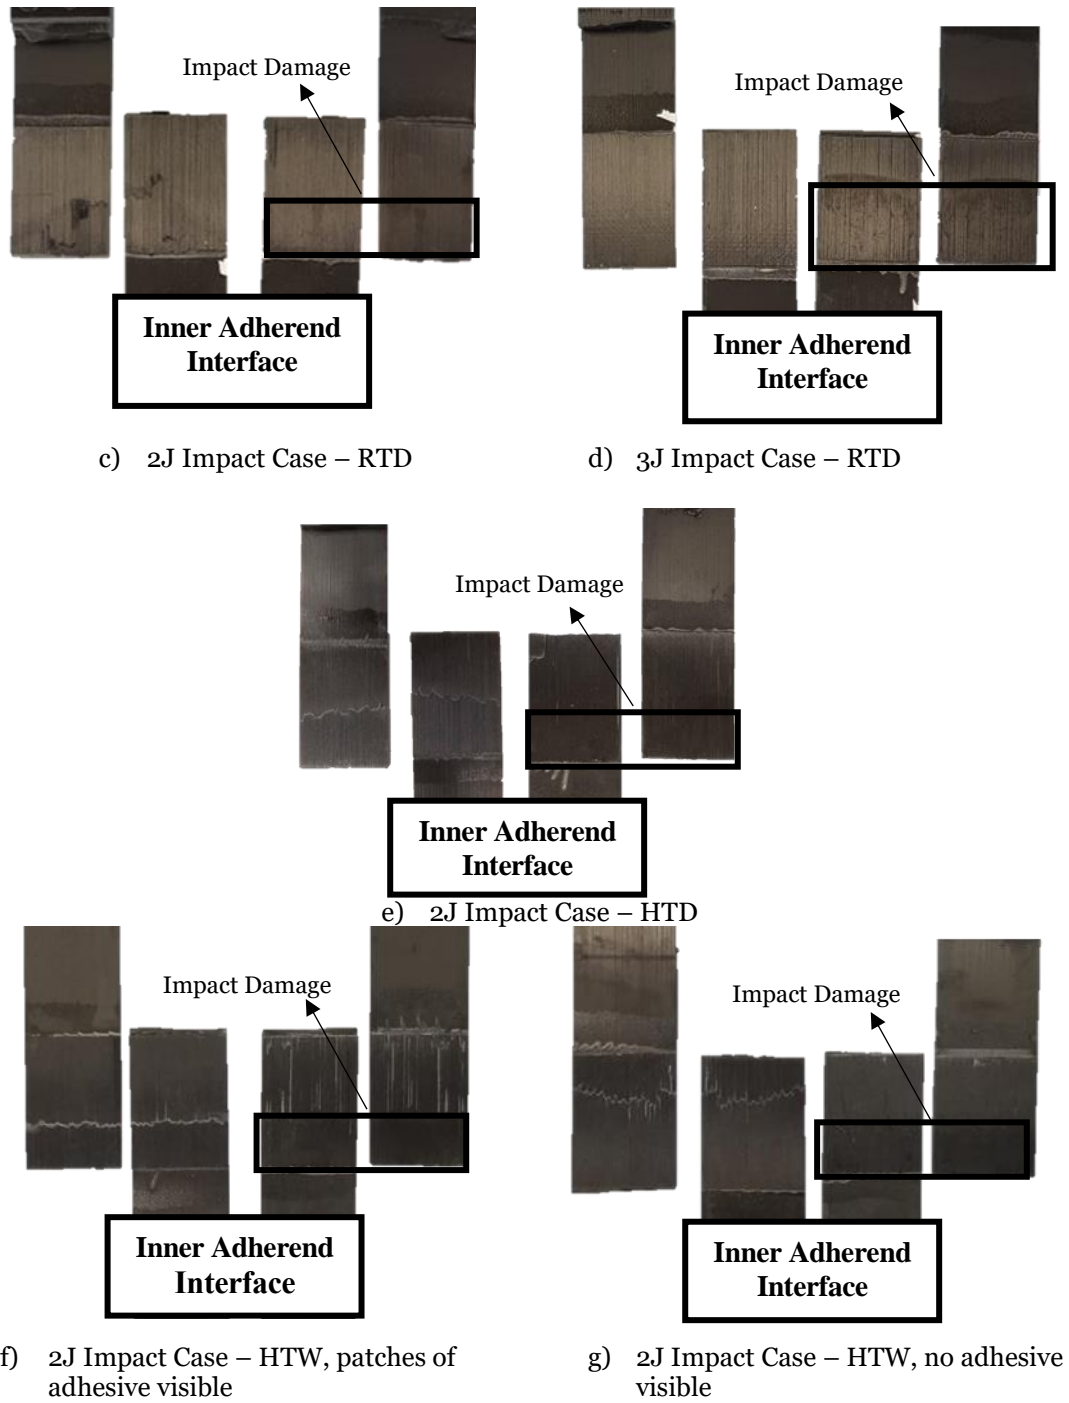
Fracture surfaces of impacted specimens after tensile test
